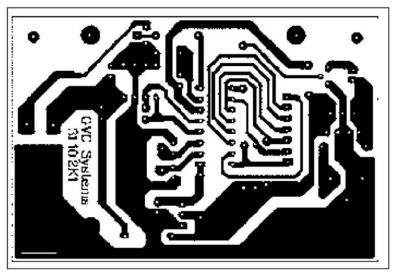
Actual-size, single-side PCB for the access-control system without keypad (Main PCB)
